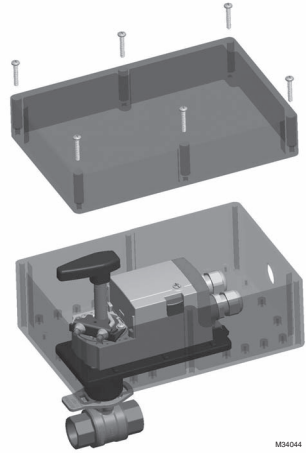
Step 3. Put on NEMA 3R enclosure cover.
